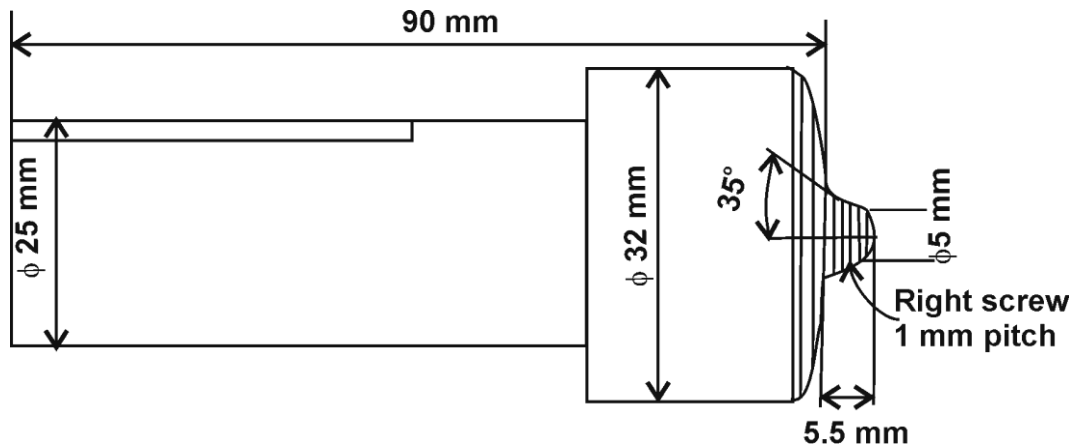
Illustrates the profile and dimensions of the PcBN tool employed for 6 mm thick INRAFM steel plate.
